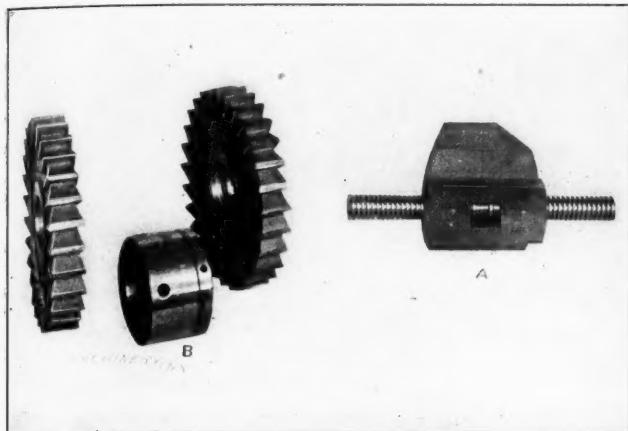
Micrometer Spacing Collar—Jaws ready to be Machined
